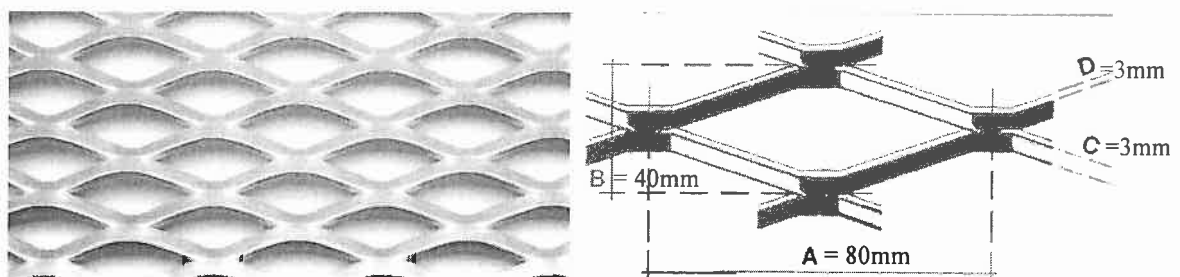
Expanded Metal Sheet and geometry of its representative module.
